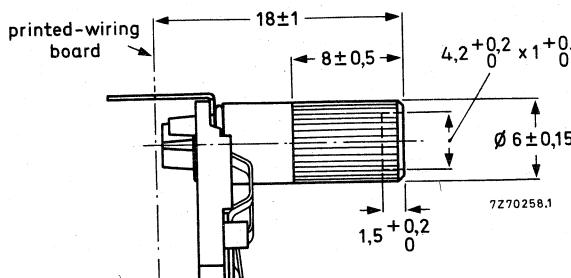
Test switch for horizontal mounting with adjustment knob at the side of the selector contact.
